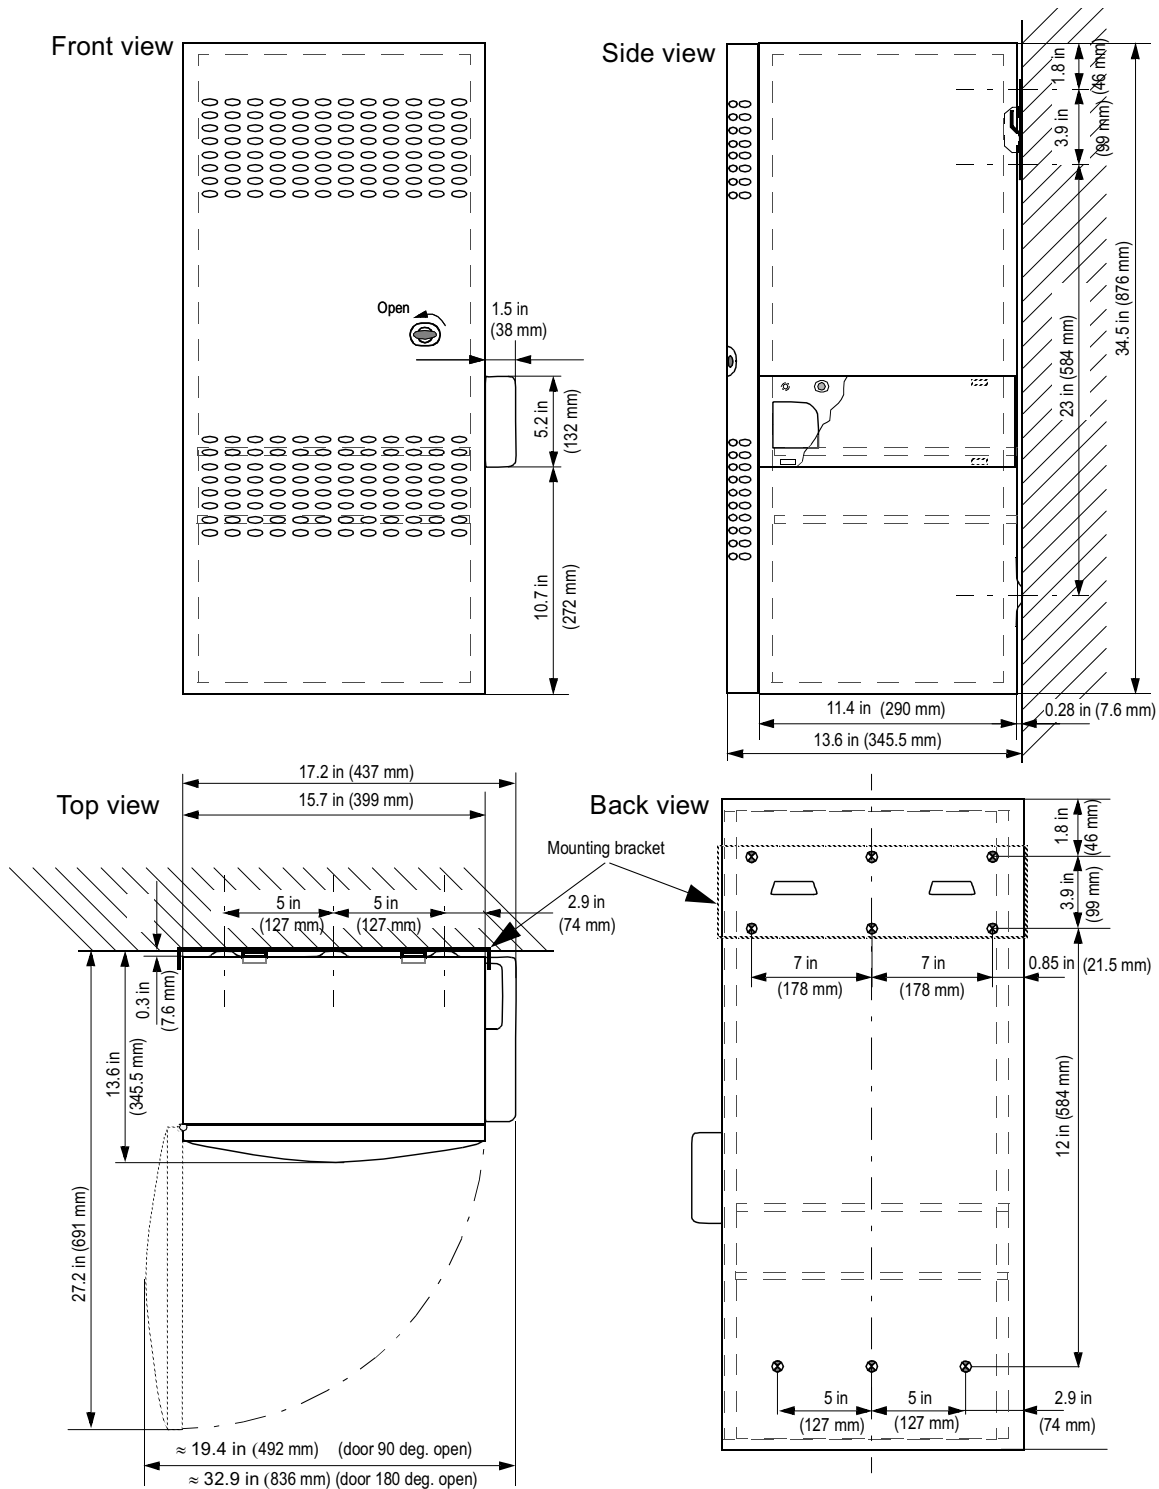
ONU mounting dimensions in [mm] and wall layout for mounting
